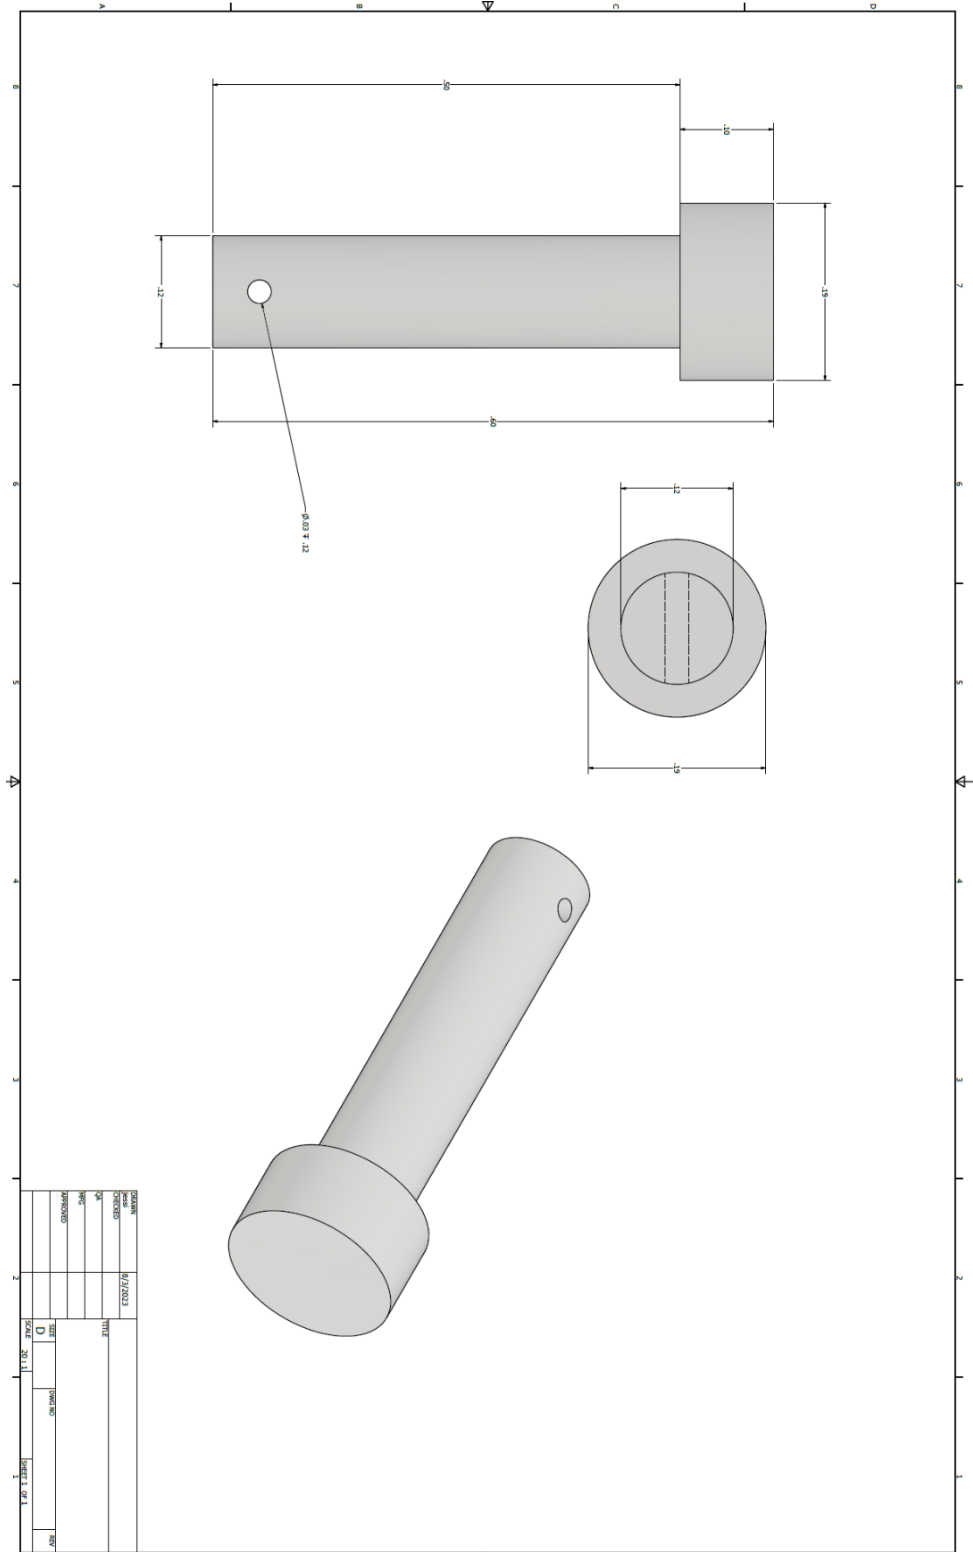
Magic-angle adjust mechanism connector to spinning assembly for cross-coil probe.
